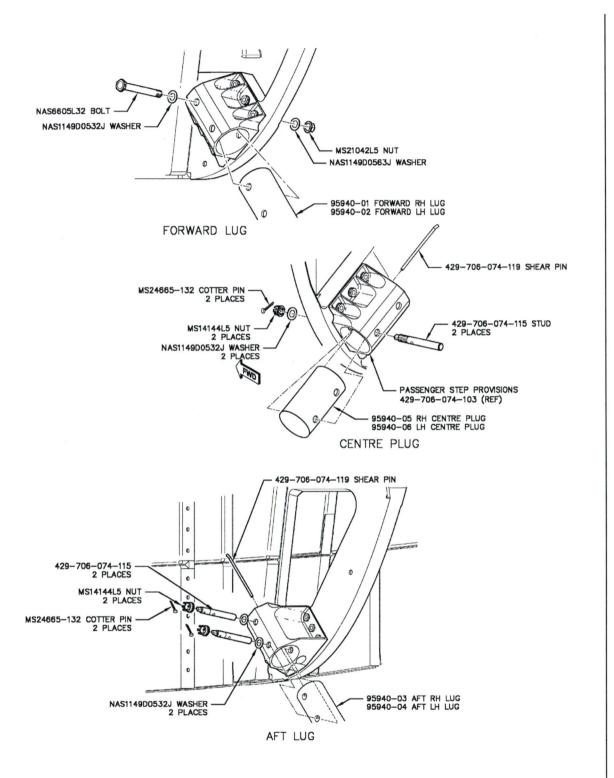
Attachment Fittings Removal / Installation – S/N 57081 & sub.
